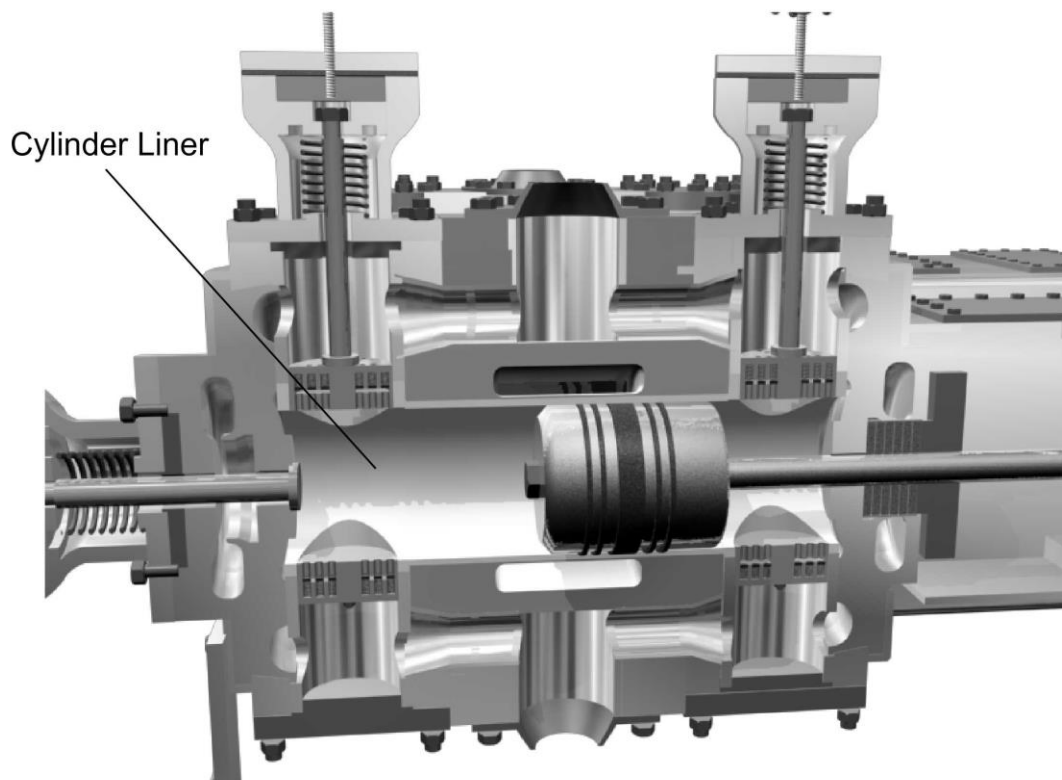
View of a compressor cylinder showing the cylinder liner
